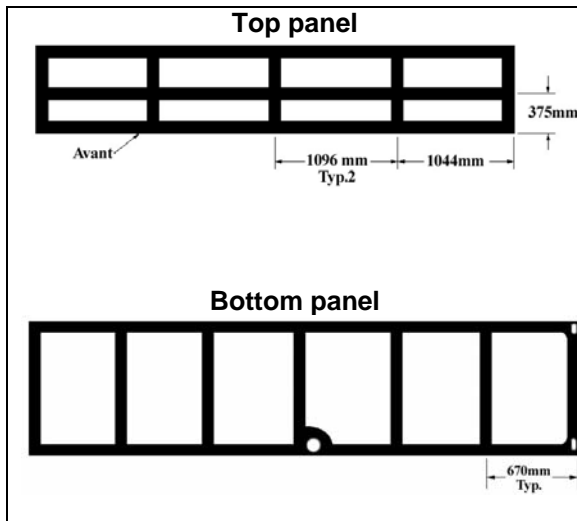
TOP AND BOTTOM PANEL INSTALLATION - SIKA 206 G+P APPLICATION
